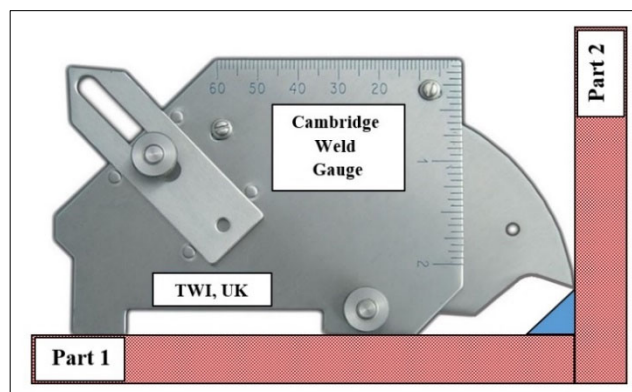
The measurement method of FWLL using a Cambridge welding gauge
